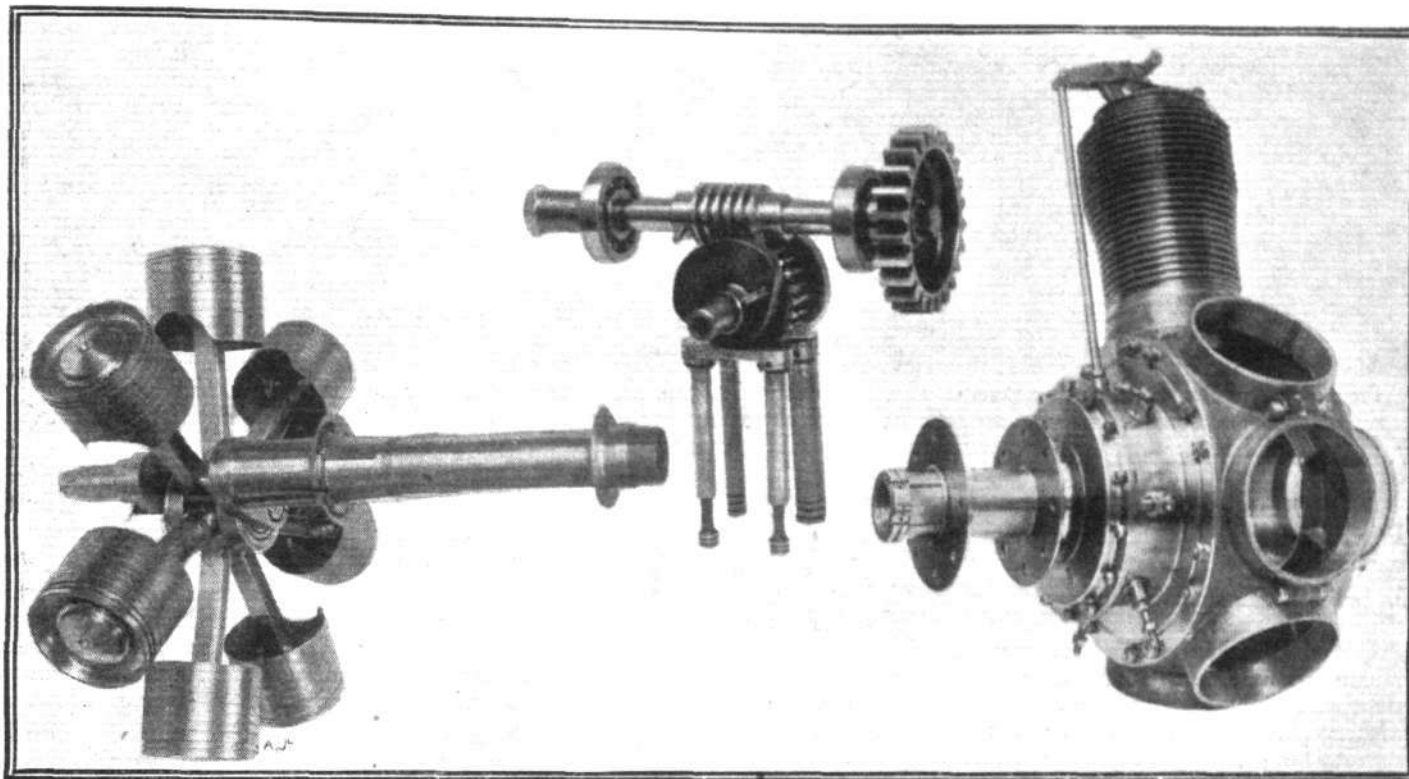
The 80 h.p. Daimler-Gnome Engine.—On the left is a view showing the pistons, connecting rods and crankshaft assembled. On the right is shown the crankcase, complete with valve gear case, nose piece and propeller boss, and one cylinder in place. In the centre the internal mechanism of the lubricating pumps is shown.
